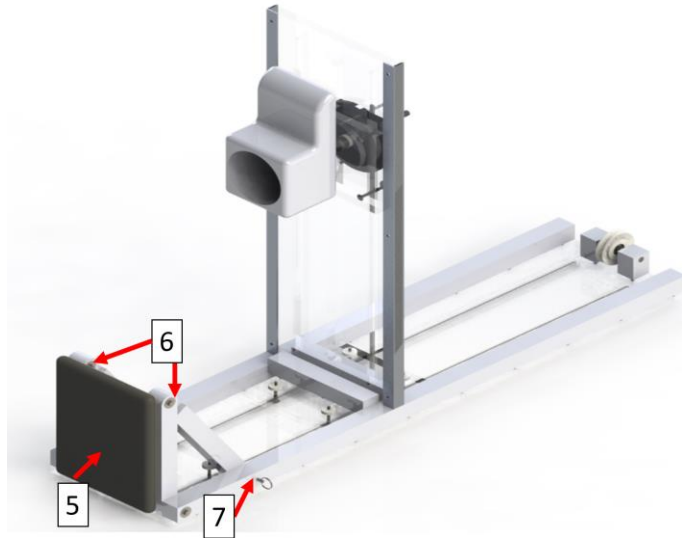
CAD Geometry of Knee Flexion Angle Pad Component in Bottom Base Assembly
